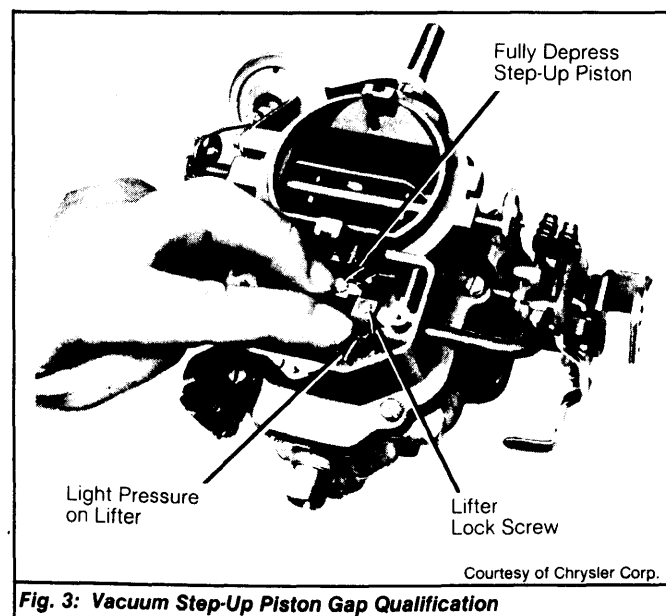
Vacuum Step-Up Piston Gap Qualification
